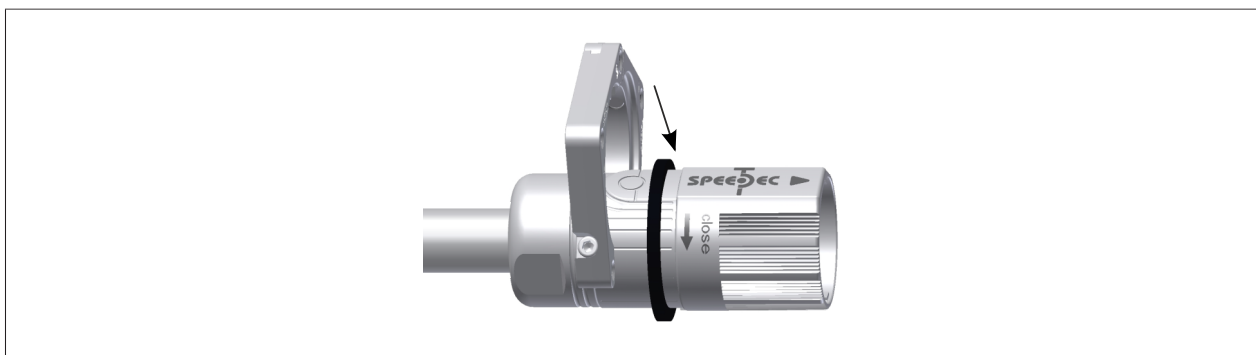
Attaching the metal flange to the connector (rear panel installation)
